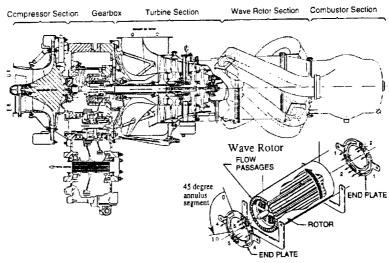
Demonstrator engine combines wave rotor with modules from existing engine line.
